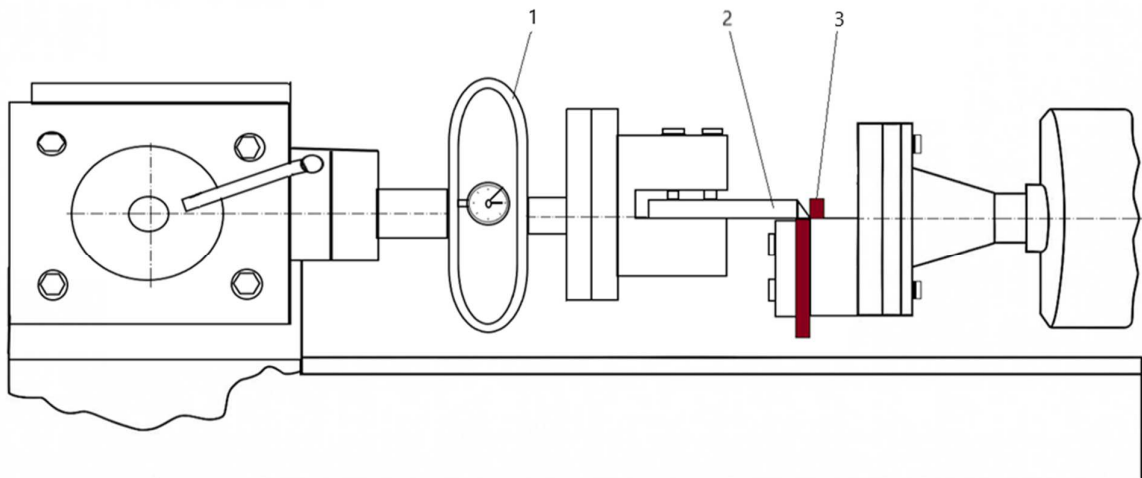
Top view of the device designed to track the evolution of the shear force magnitude: 1 - dynamometer, 2 - punch, 4 - workpiece.
